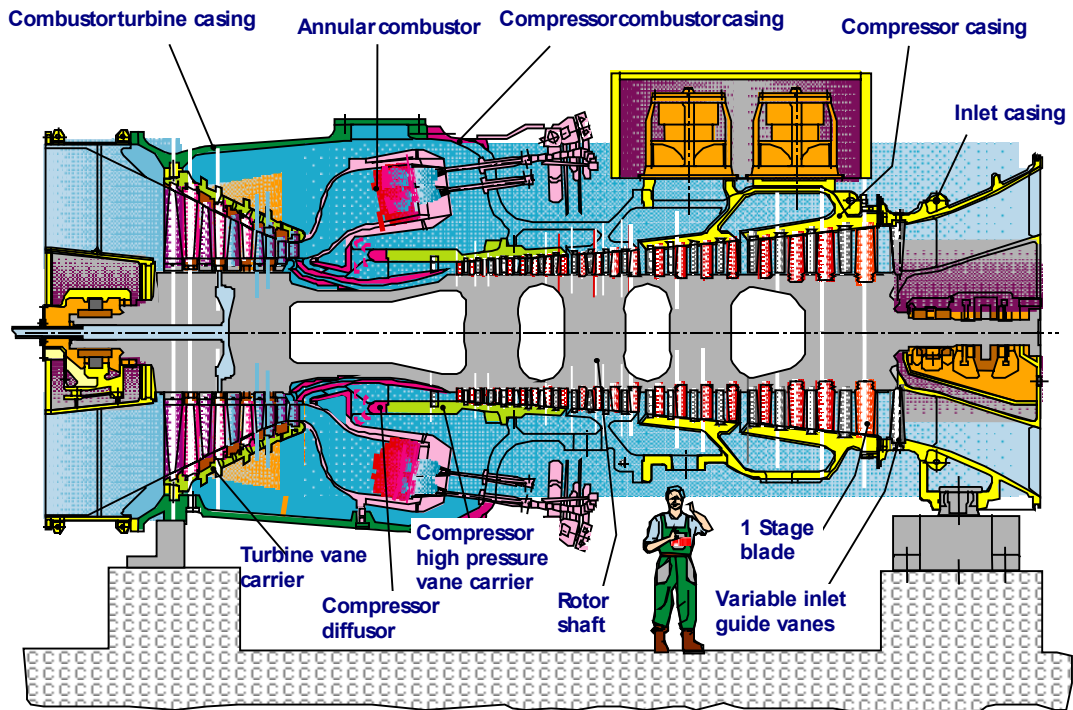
Heavy duty gas turbine with annular combustor (Source: Alstom Power AG)
